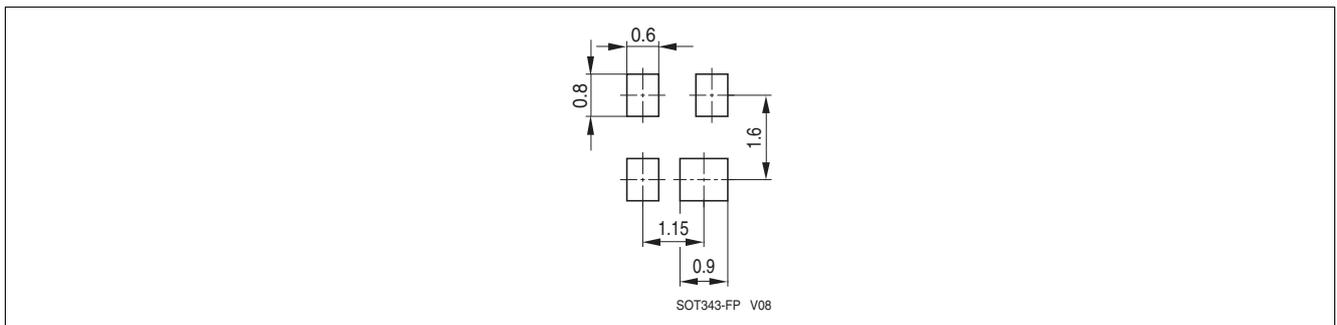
Package Footprint for SOT343 (dimensions in mm)
